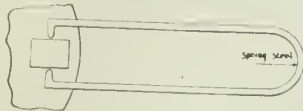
HAND TOOL FOR MAKING CATCHES.
